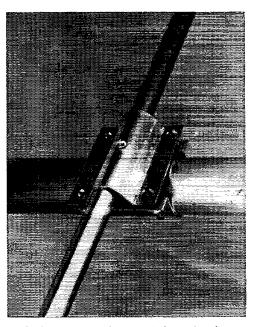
Model showing the method of mounting elements on the boom without drilling holes through the latter. For strongest permanent assembly, self-tapping screws should fasten the sheet-metal clamps in position.
